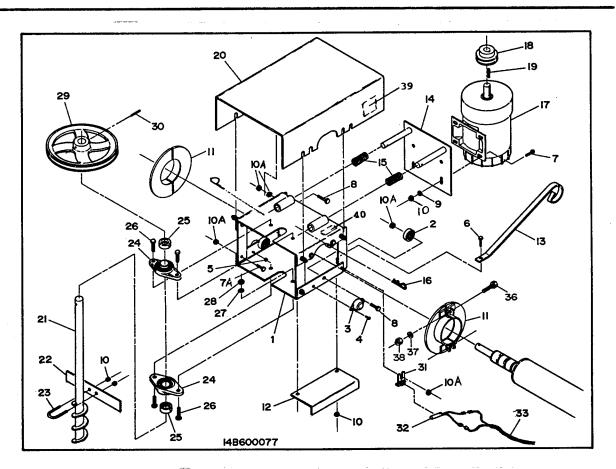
OUTSIDE CARRIAGE (STIRWAY II) PARTS
